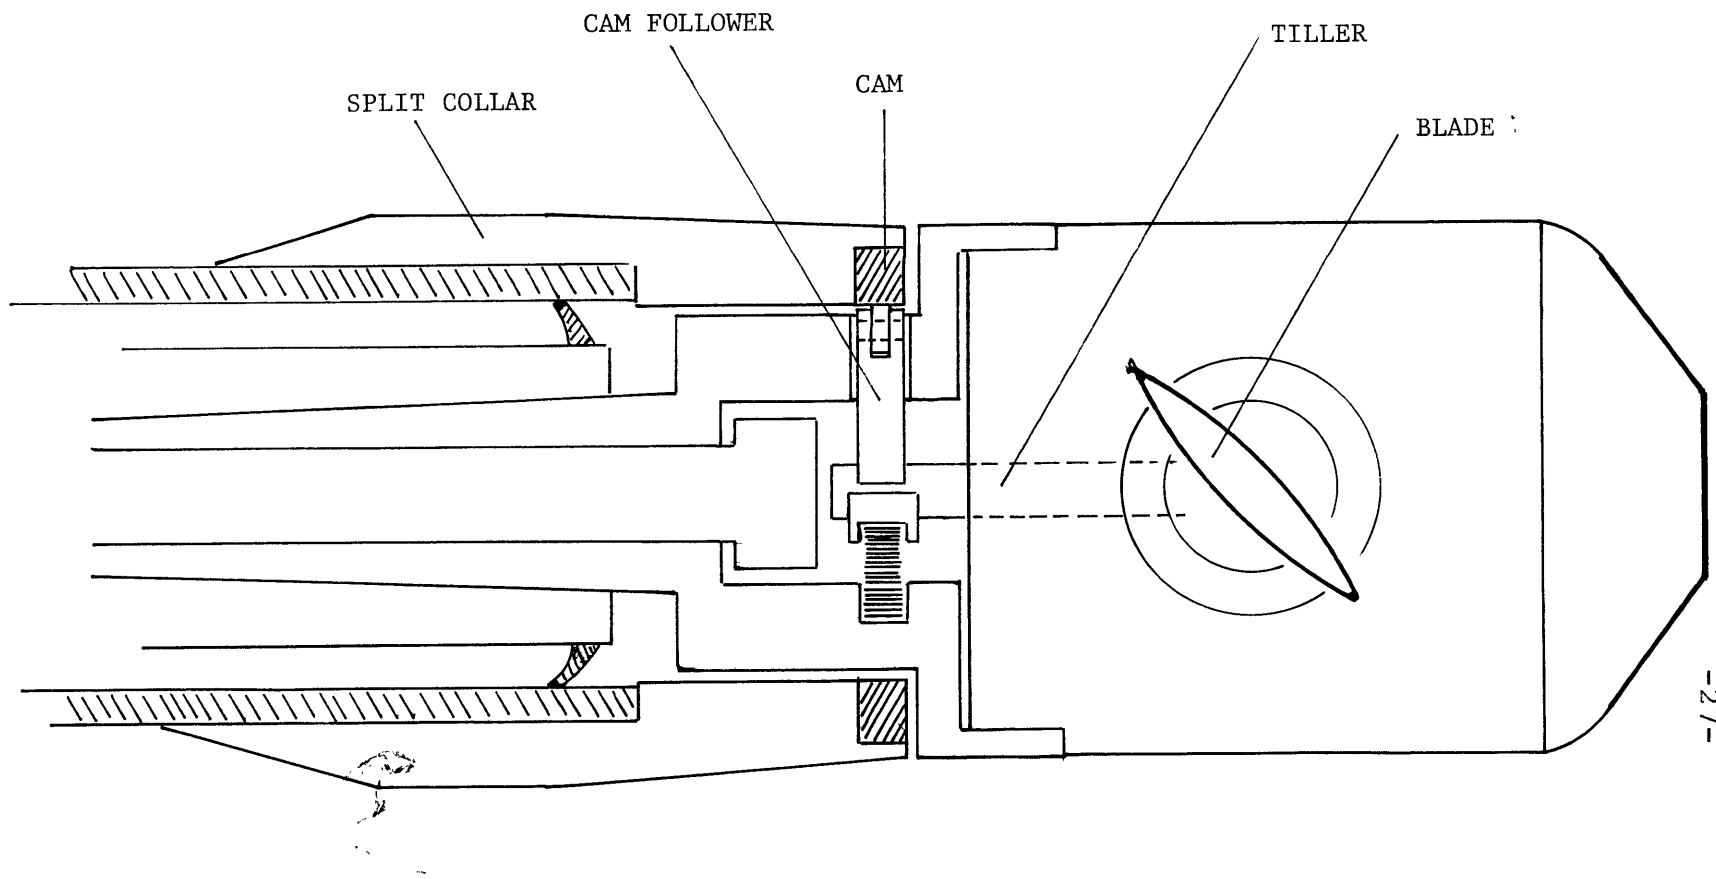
SIDE SECTIONAL VIEW OF OSCILLATING MECHANISM
